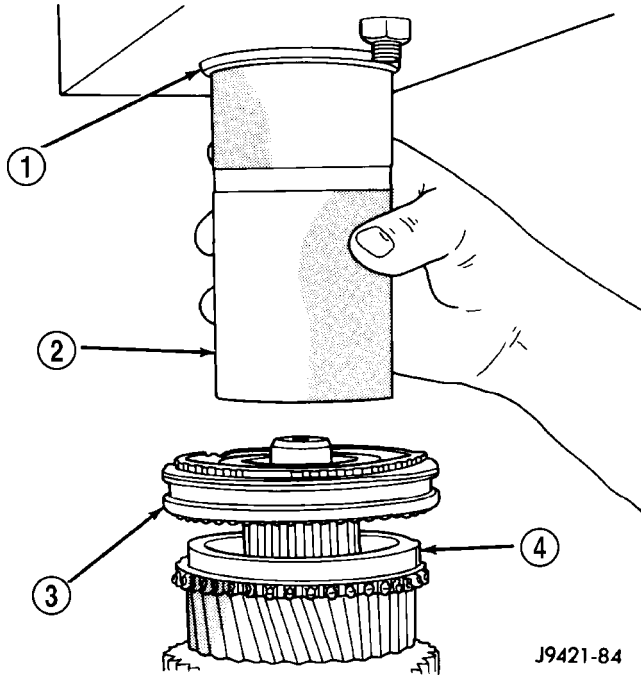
3-4 SYNCHRO ON OUTPUT SHAFT
